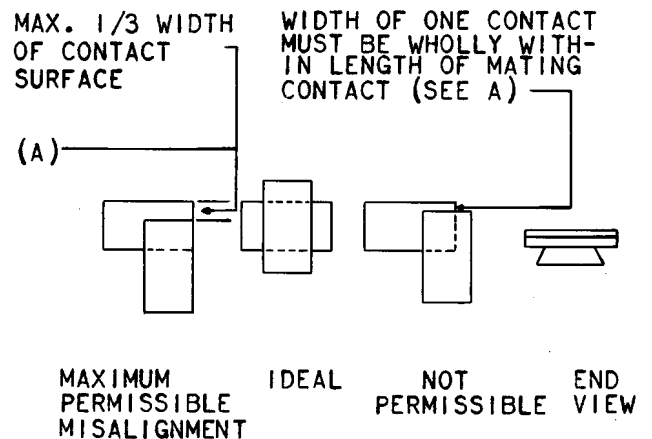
Alignment of Heavy Bar-Type Contacts—Plan View of Contact Surfaces
